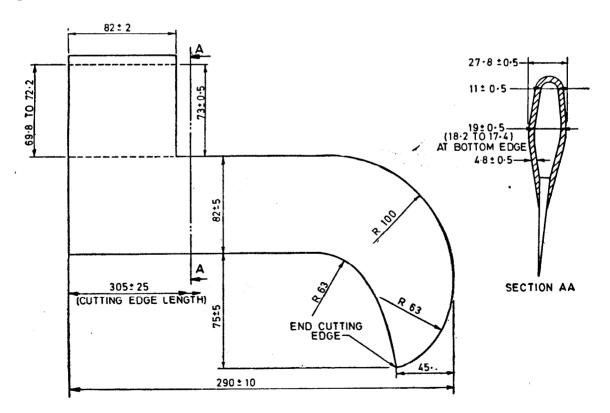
TYPICAL SKETCH OF BRUSH HOOK
